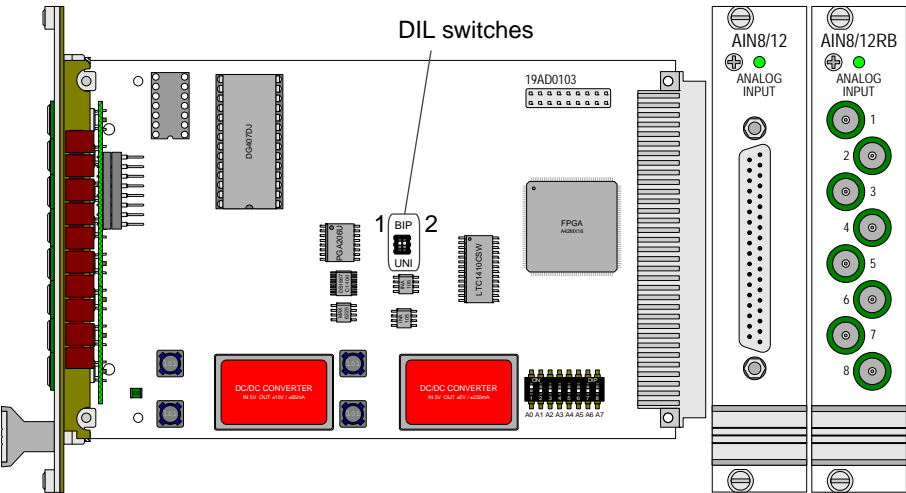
Pro-AIn-8/12 REVB: Board and front panel
